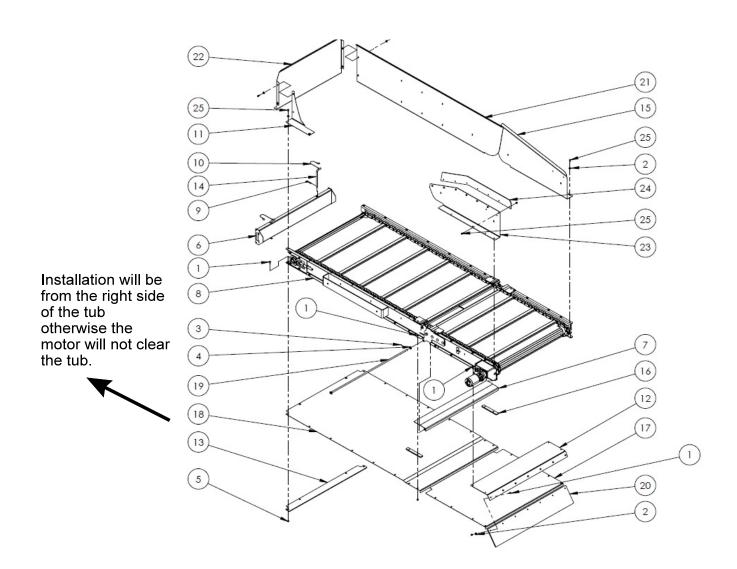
Right Hand Hydraulic Folding Conveyor Assembly
